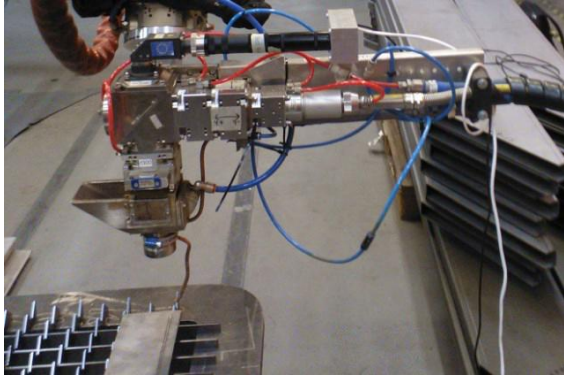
The laser welding test setup. The camera is attached to the welding head (from Precitec) through a 90 degree mirror and focusing lens. The fibre laser is brought from a collimator through 90 degree mirror optics to the work piece. The focal position of the laser was -4mm (below the surface).
